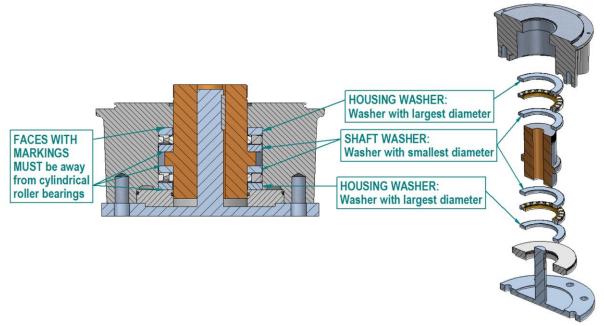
Valve Stem Assembly with Cylindrical Roller Bearings
